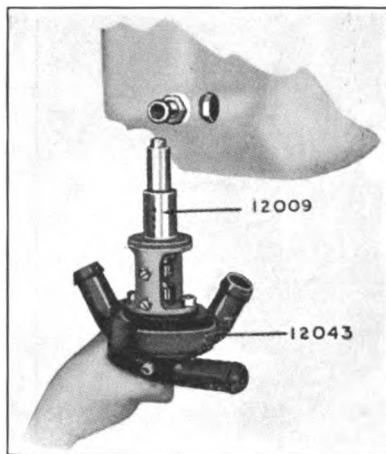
Method of assembling or disassembling oil and water pumps, models A, I and E.
